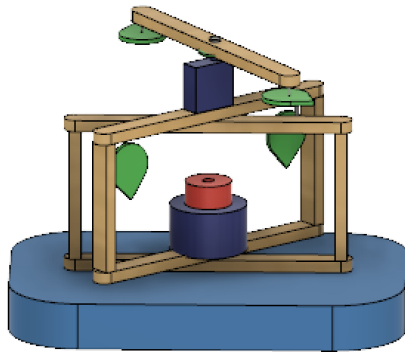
Finished assembly with the box supporting the whole frame. Box can be any size or dimension as long as it supports the whole frame, which is 112.7 mm long. The box used in the design is 212 mm by 143 mm by 63.5 mm. The frame can be placed anywhere on the box also long it supports the whole frame.
